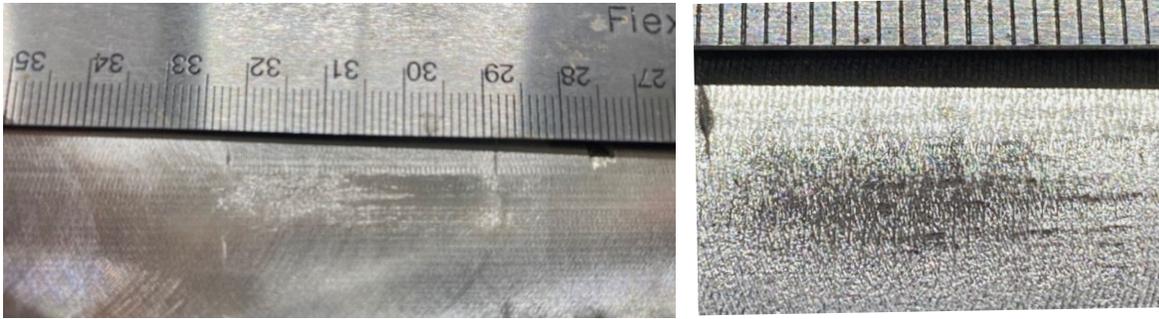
Photo of Type 308/309 stainless steel weld overlay after 40 hours of exposure to the submerged jet testing (left) and close-up image (right). The damaged area is significantly less than mild steel. Ruler tick marks are in millimeters.
